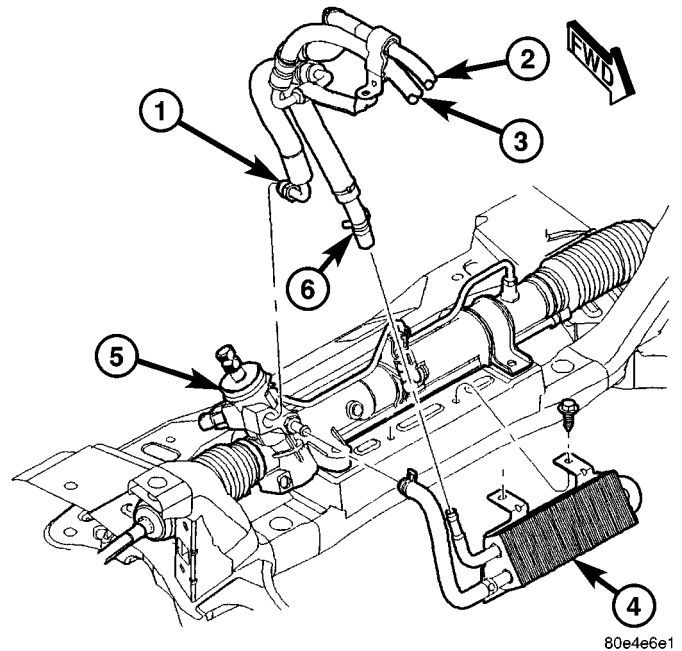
Hoses And Cooler At RHD Gear - 2.0L Engine
